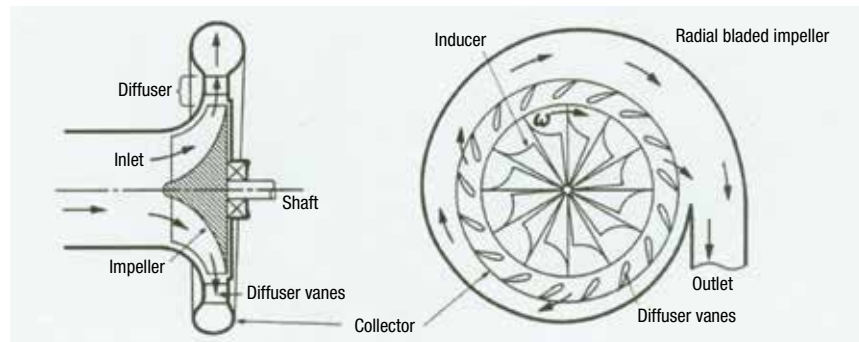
Centrifugal compressors have a rotating impeller that imparts head to a fluid
